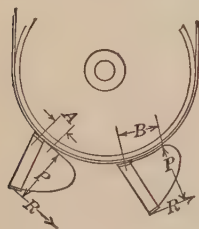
Pull on Bucket Bolts Dependent on Shape of Bucket.
